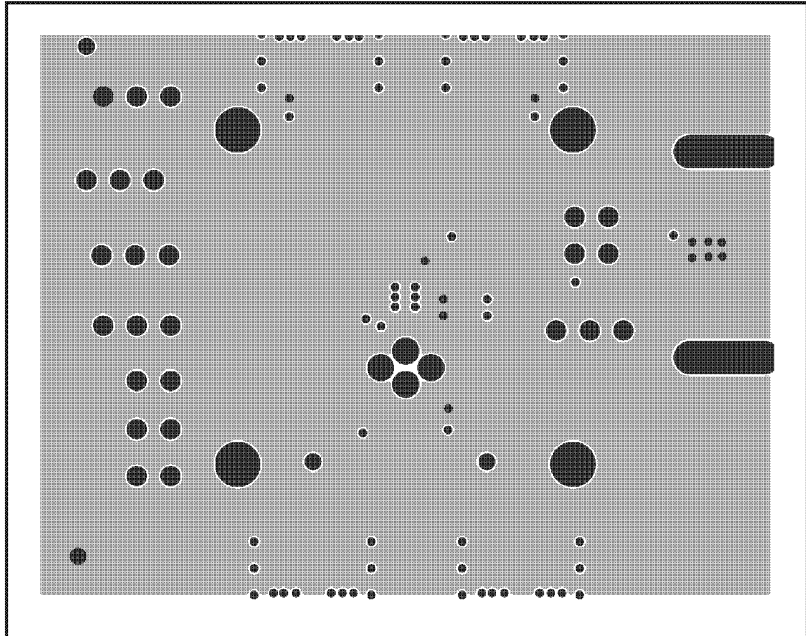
MAX3967A EV Kit PC Board Layout - Power Plane.
